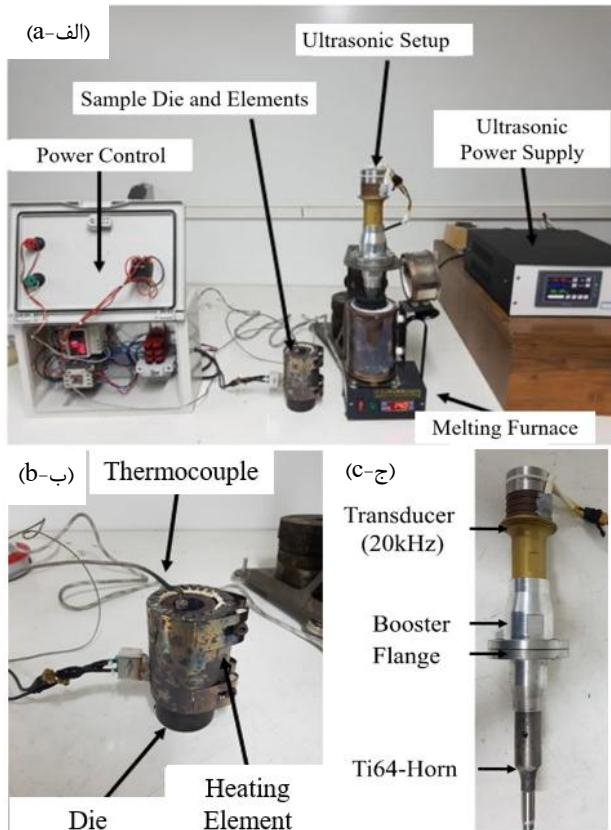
a) Ultrasonic setup, power supply, casting mold and element, melting furnace, mold temperature control panel, b) Molding Die, and c) Ultrasonic system: transducer, booster, and horn.
